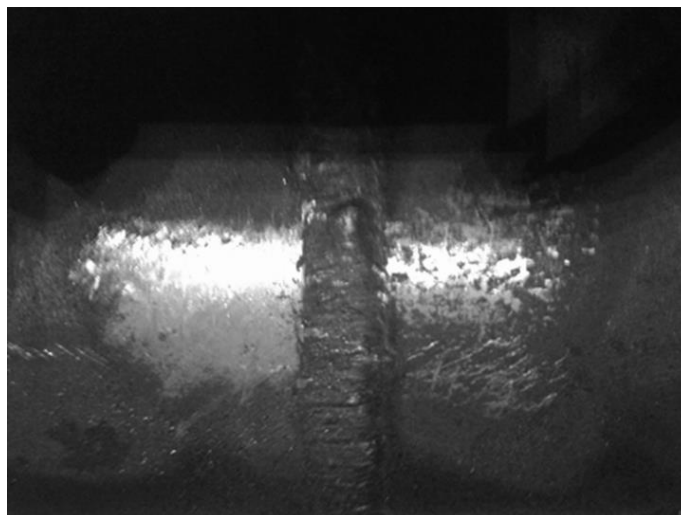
A sample of the main gas pipeline section (a section of welded joints at Central Asia-Center main gas pipeline, 09GSF steel, DN is 1420 mm, Brinell hardness number, HRB = 110)
